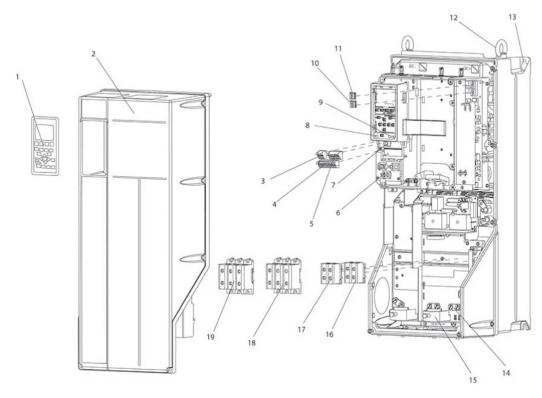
Exploded view of Frame Sizes B and C, IP55, IP66 UL Type 3R, 12 and 4X
